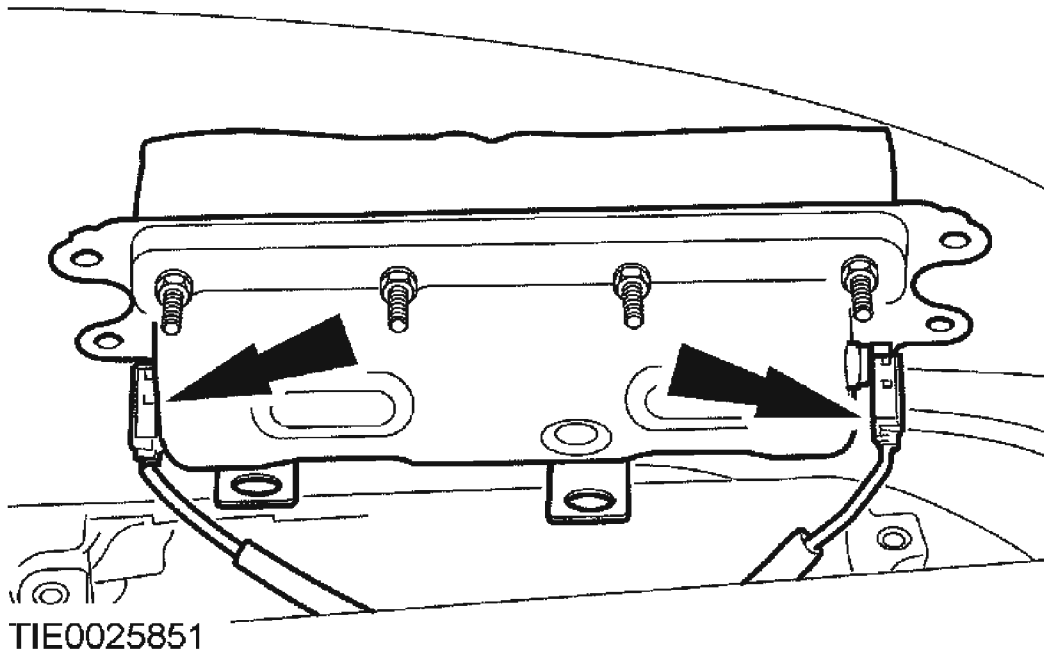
Connecting Passenger Air Bag Module Electrical Connectors
